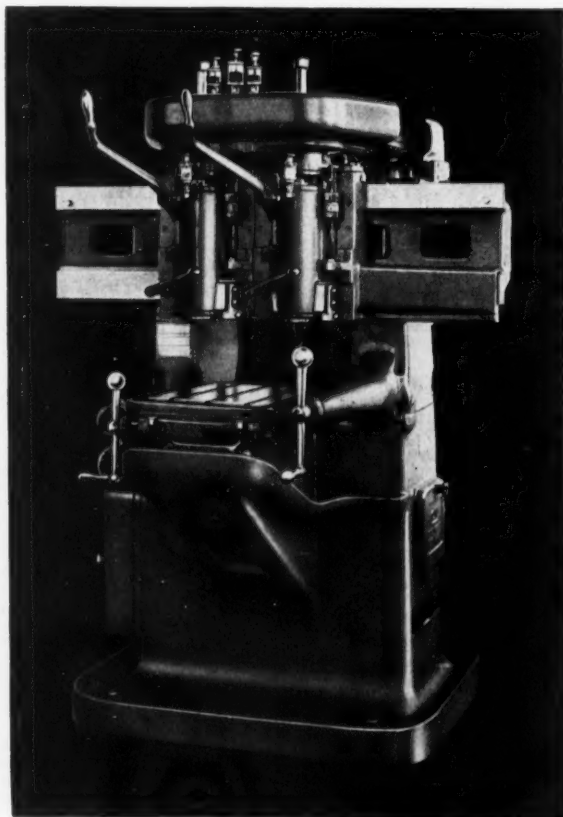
Pratt & Whitney High-speed Vertical Milling and Profiling Machine
